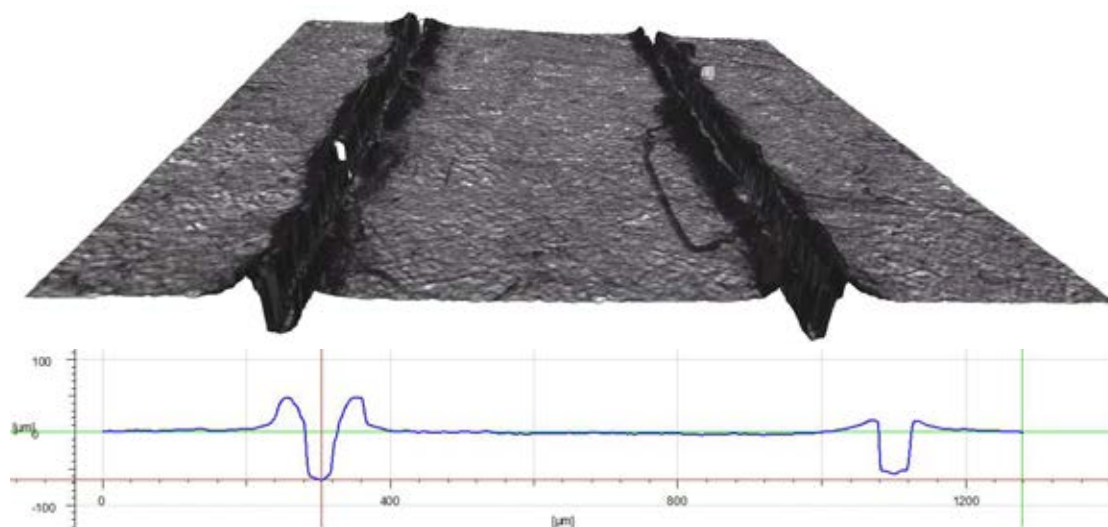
The top picture show an 3D view of the surface of the carbon tape after cutting it with a diamond saw. The bottom view is a perpendicular profile of the surface and shows a $50 - 60 \mu\text{m}$ cutting depth. AFM measurements done by Dr Pavel Penchev.
